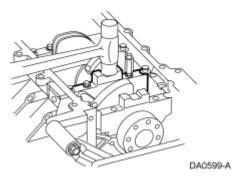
Locating Rear Main Bearing Cap Courtesy of FORD MOTOR CO.
